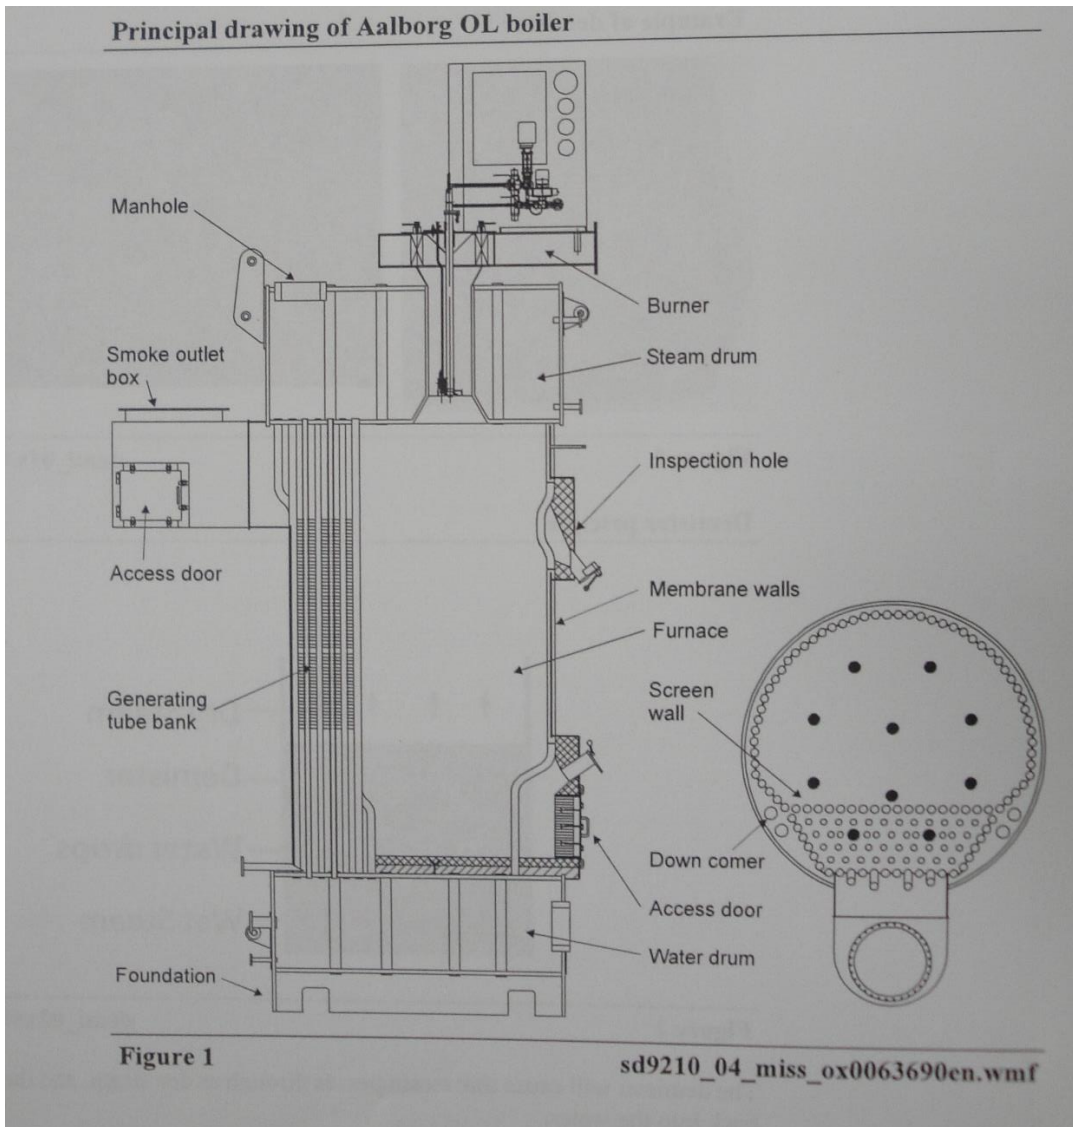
Boiler layout and details (Aalborg OL Boiler SD9210_04#B.1)
